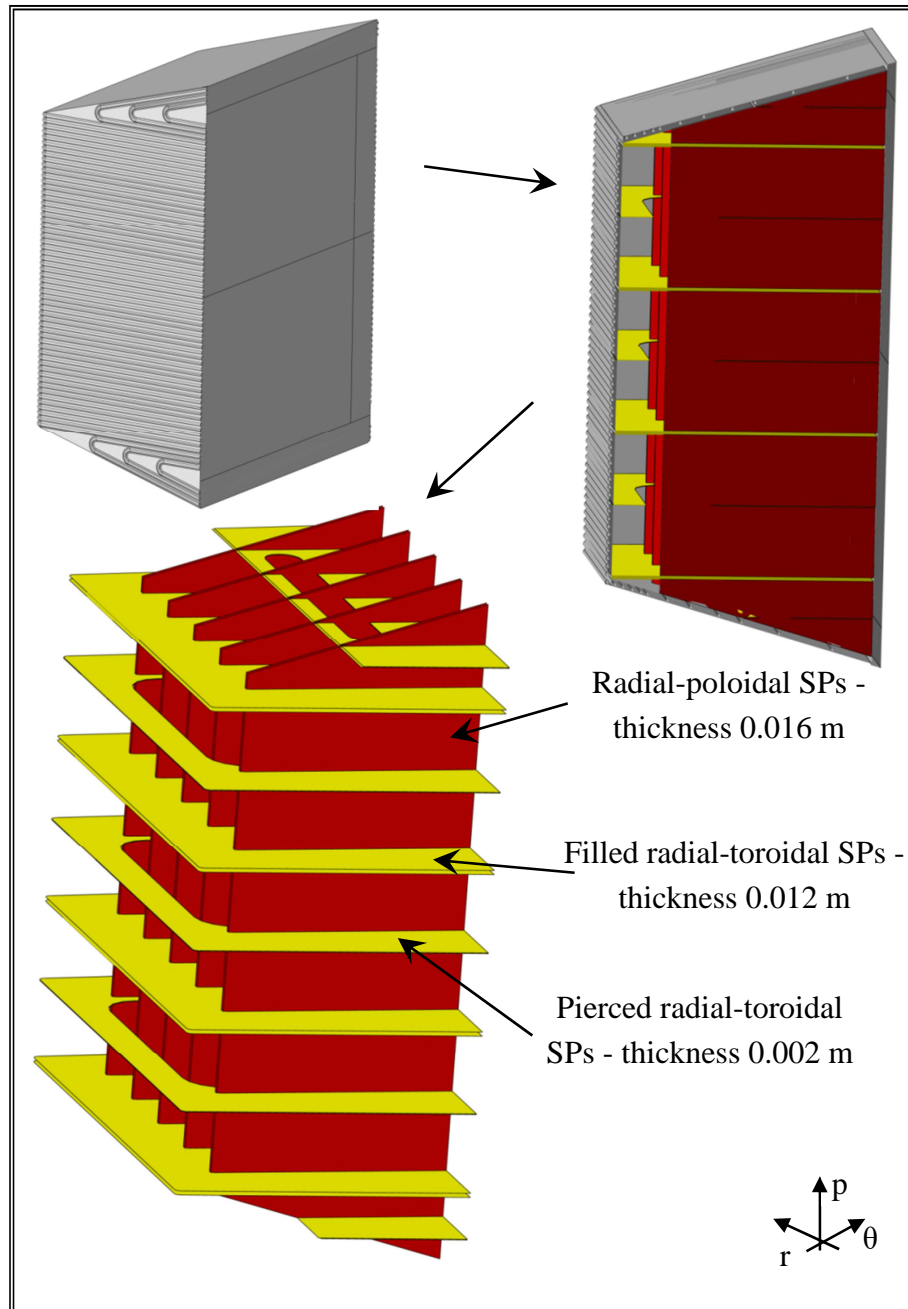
Configuration 5 - 3D geometric model exploded view.
